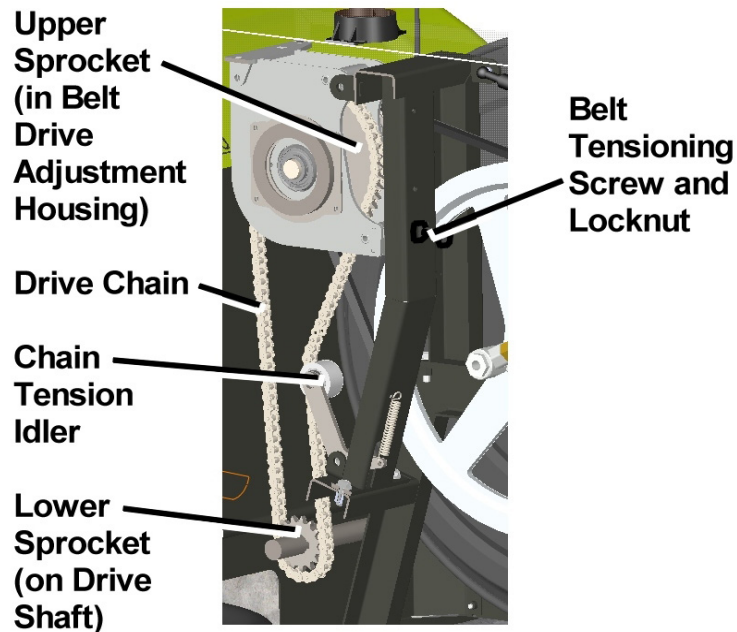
Hose Reel Chain Drive and Belt Tensioning Screw
